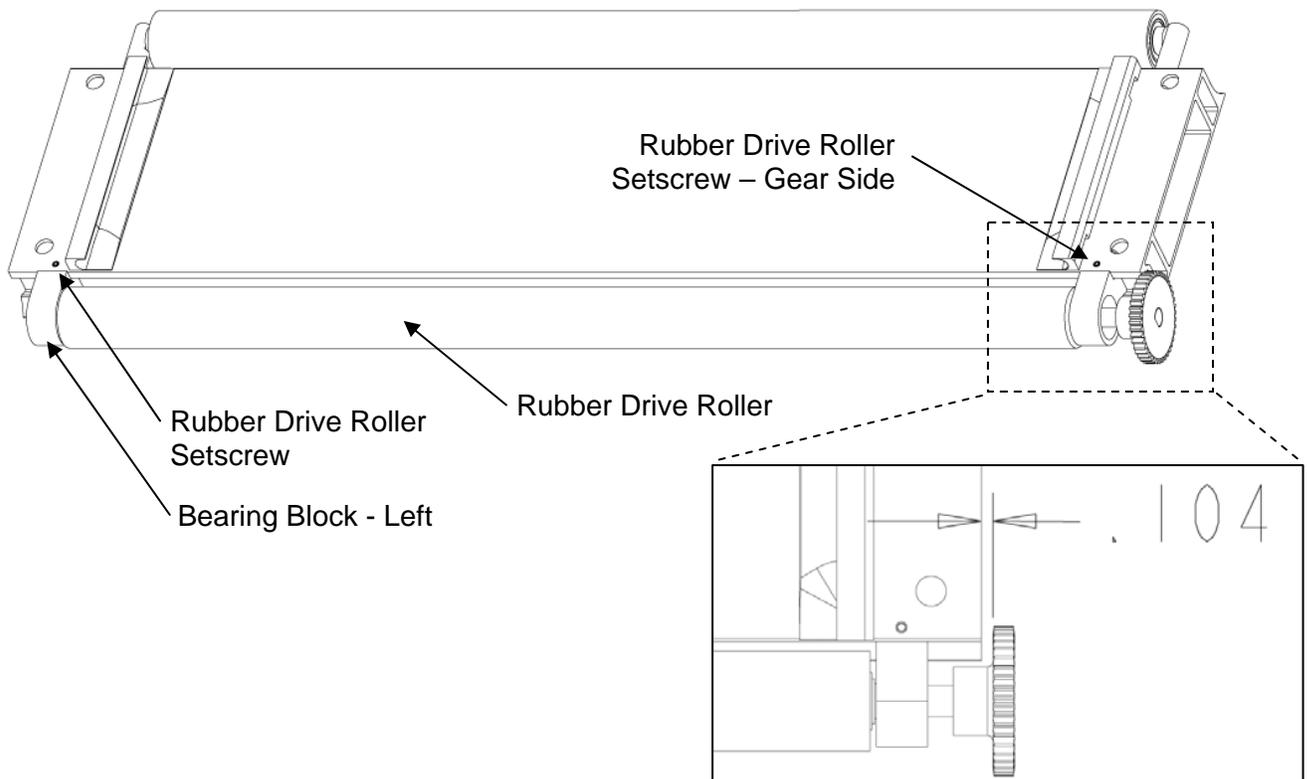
CHECKING THE SPACING OF THE DRIVE GEAR
